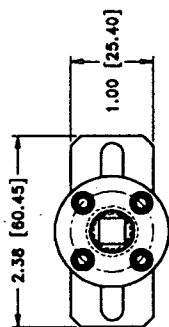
PBPM KINEMATIC MOUNT FLAT ASSEMBLY
